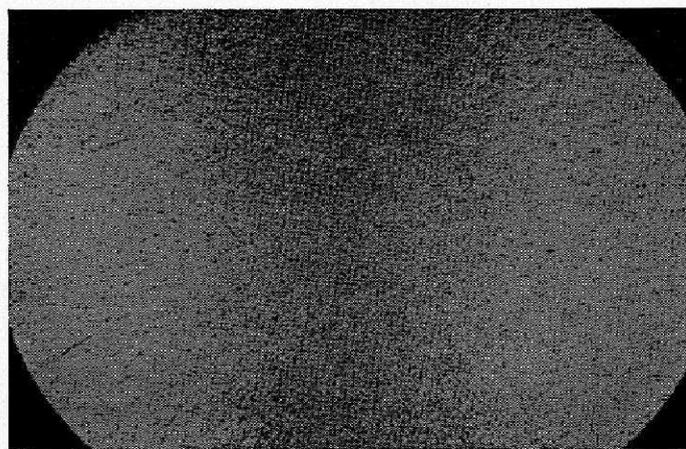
(1203) — ELECTRICAL RESISTANCE BUTT WELD IN $\frac{3}{16}$ IN. K-MONEL ROD. AS-WELDED ($\times 50$)
